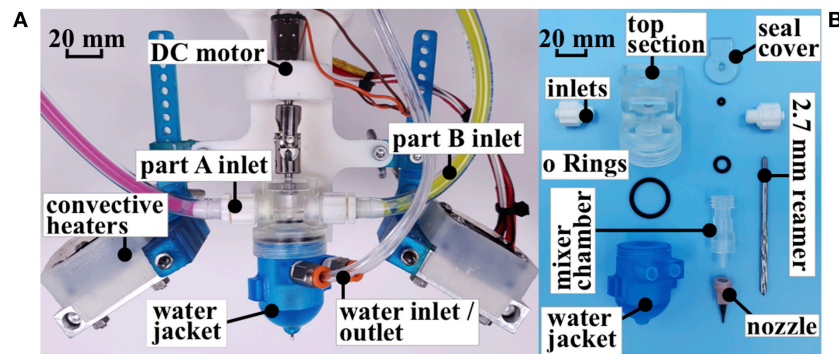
| (A) Extruder mechanism with water jacket addition. (B) Mixer assembly.
